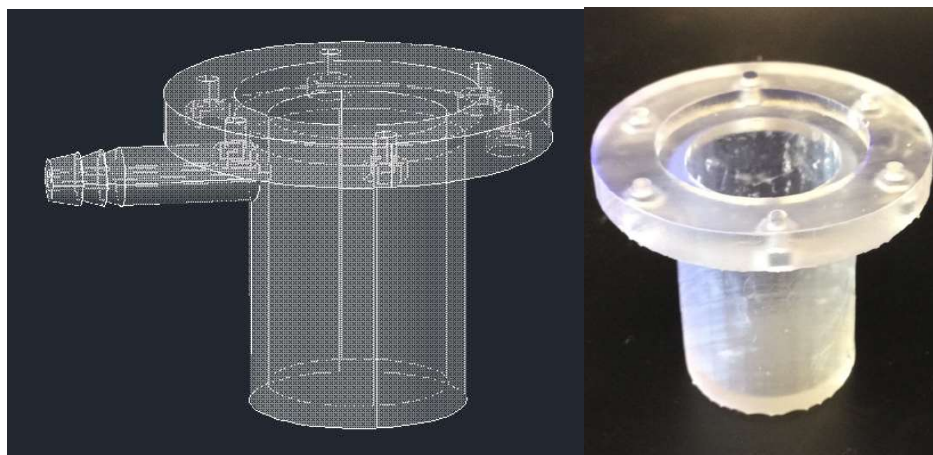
Reaction vessel bottom. Left – CAD design. Right – 3D printed object.
